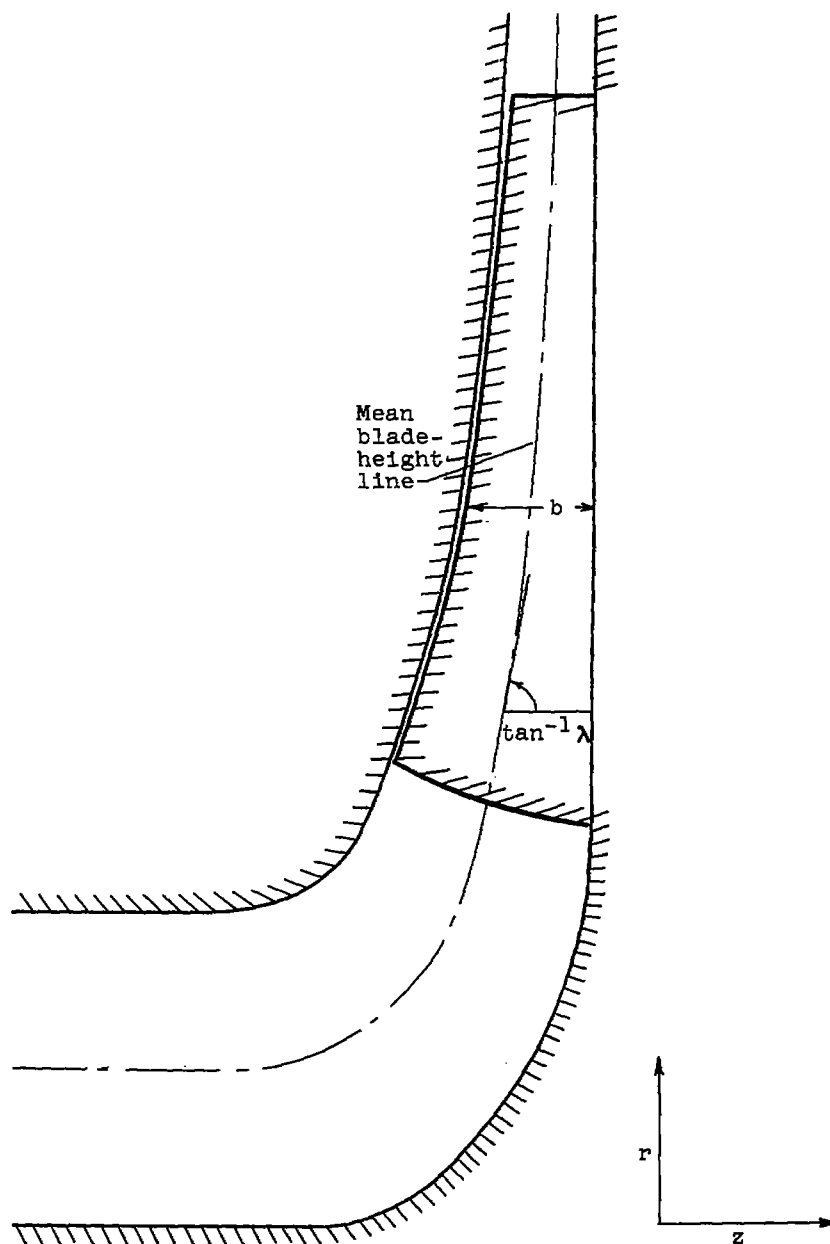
Axial-radial plane view of 48-inch-diameter centrifugal impeller.
